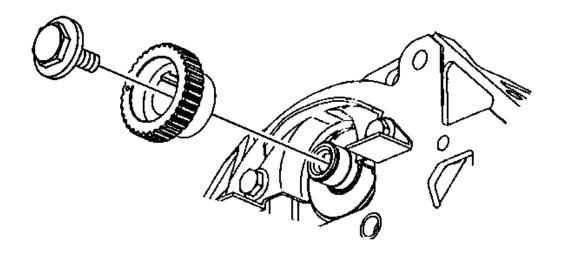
Balance Shaft Driven Gear & Bolt Courtesy of GENERAL MOTORS CORP.
